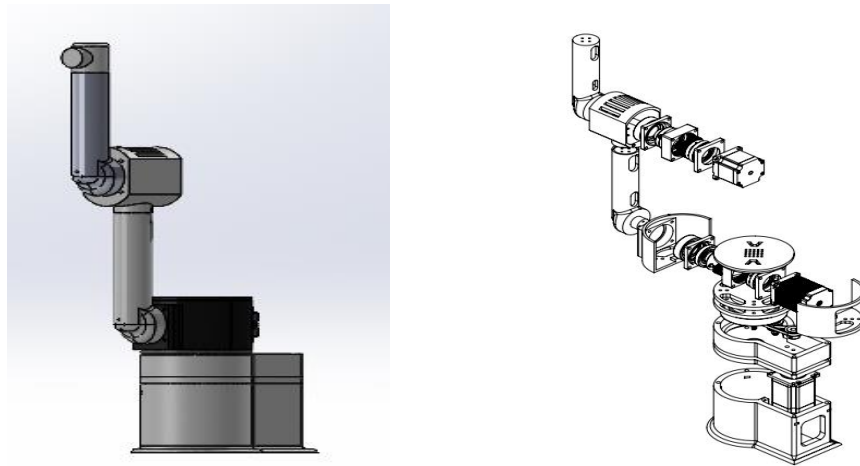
Complete and exploded views of robot arm. Left shows the assembled design, right shows the exploded view.
